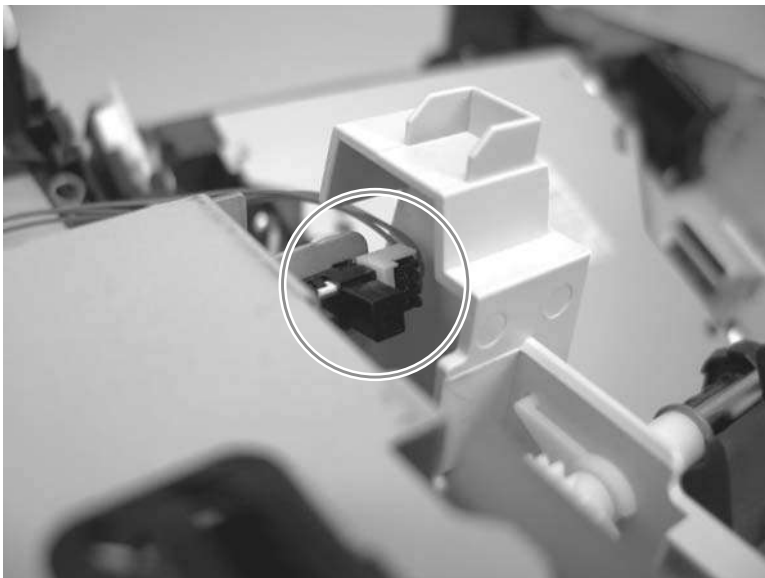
Remove the paper-delivery assembly (4 of 4)
